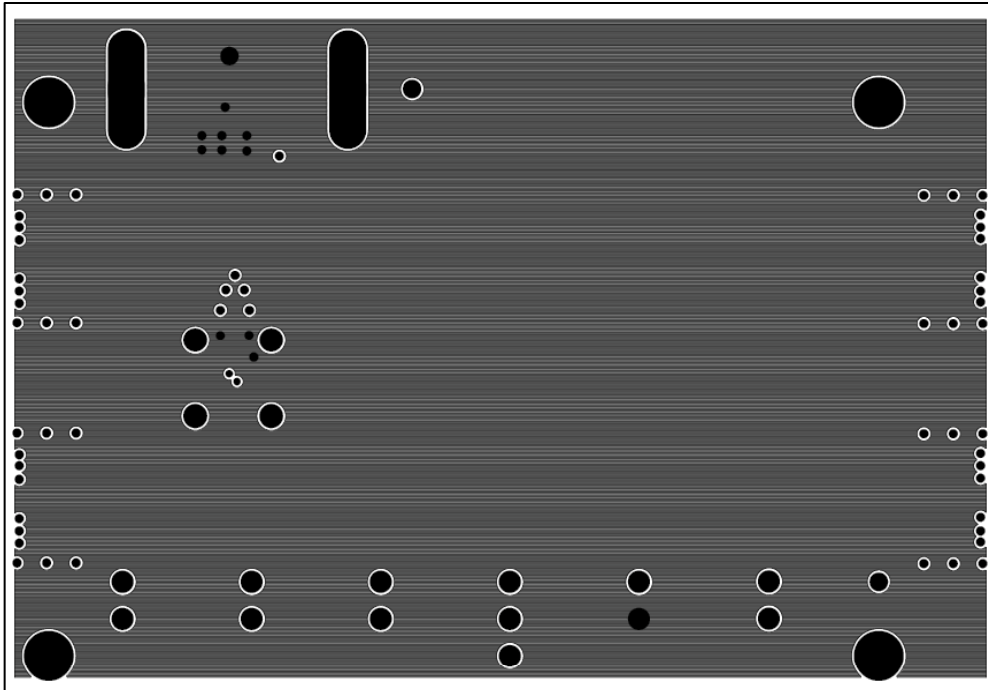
MAX3982 EV Kit PC Board Layout – Power Plane, Layer 3
